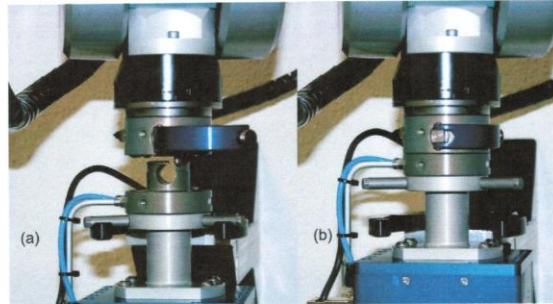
Tool-locking mechanism: (a) unlocked and (b) locked
